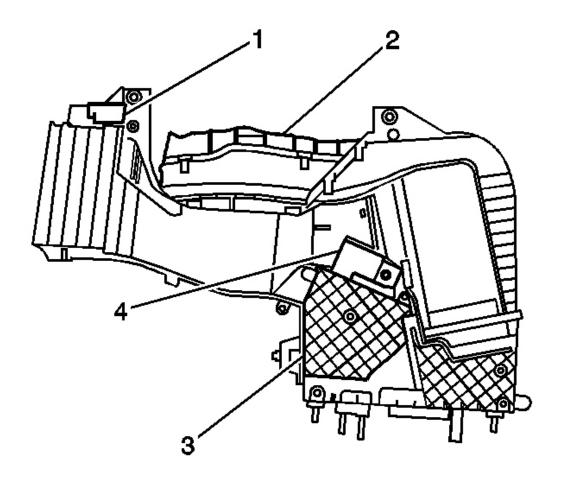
Removing/Installing Auxiliary Heater Core Courtesy of GENERAL MOTORS CORP.
